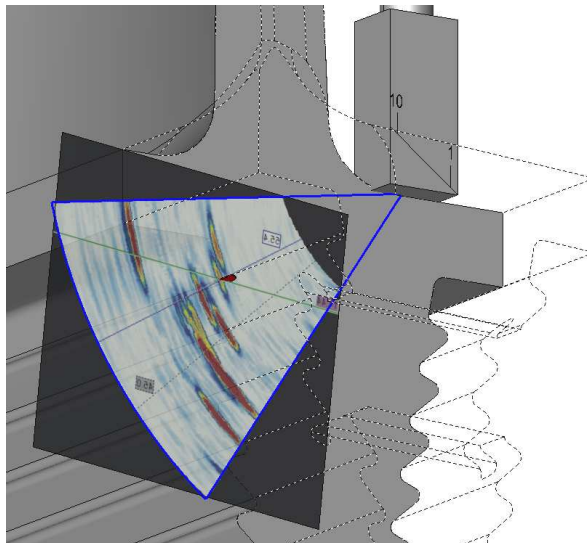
Example of sizing technique for probe P37 on the platform of R 10 blade.
